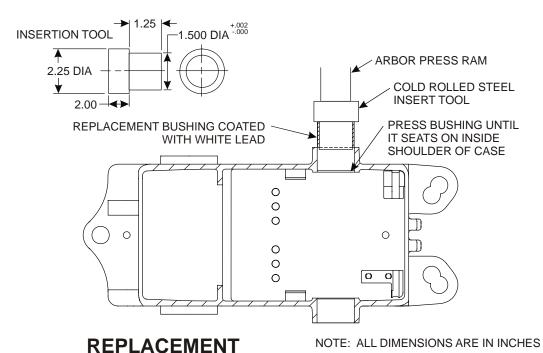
Removal and Replacement of Cam Shaft Bushings
